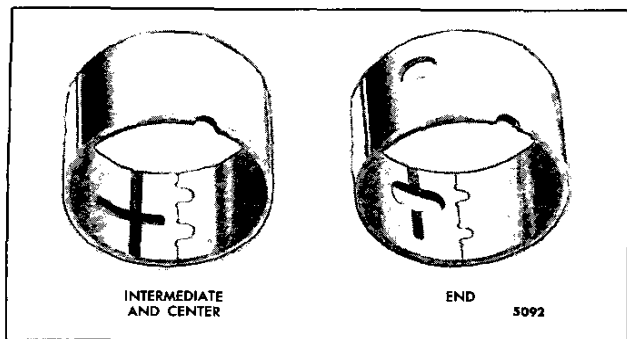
Camshaft and Balance Shaft Bearing Identification
